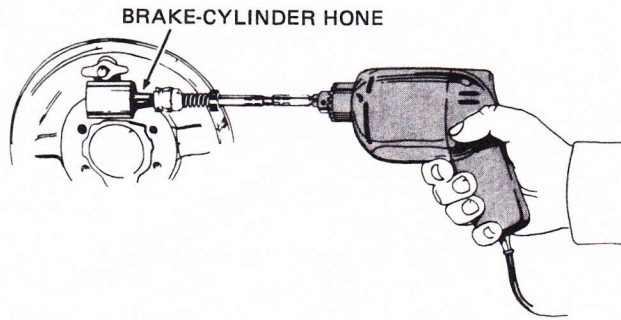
Honing the bore in a wheel cylinder. (ATW)
